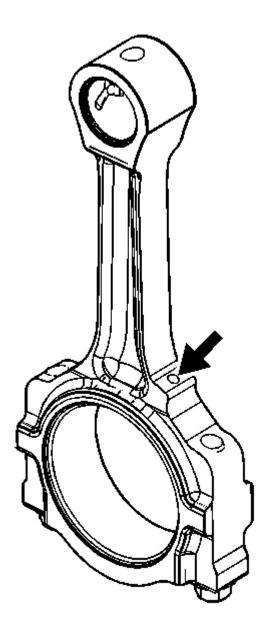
Identifying Connecting Rod Oil Hole Courtesy of GENERAL MOTORS CORP.
